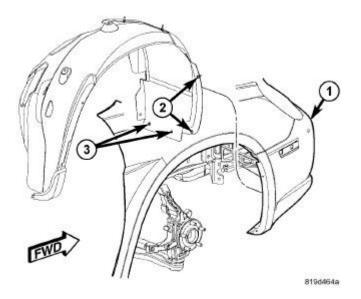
Removing/Installing Front Splash Shields Courtesy of CHRYSLER LLC
